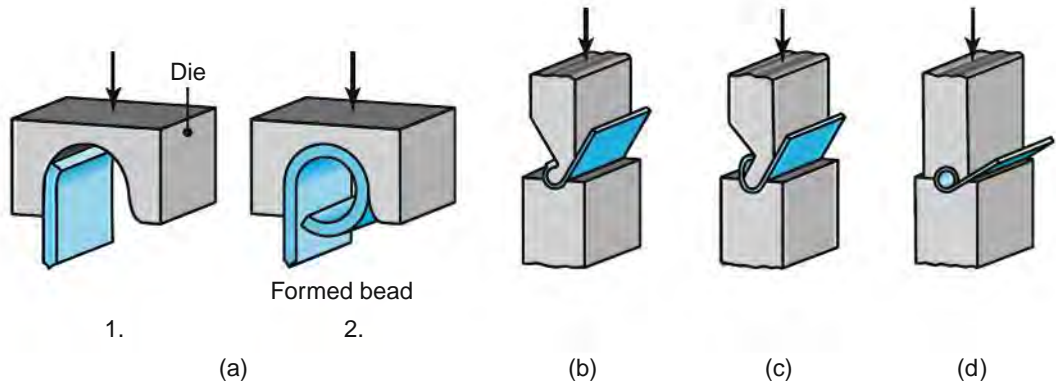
(a) Bead forming with a single die. (b) through (d) Bead forming with two dies in a press brake.
